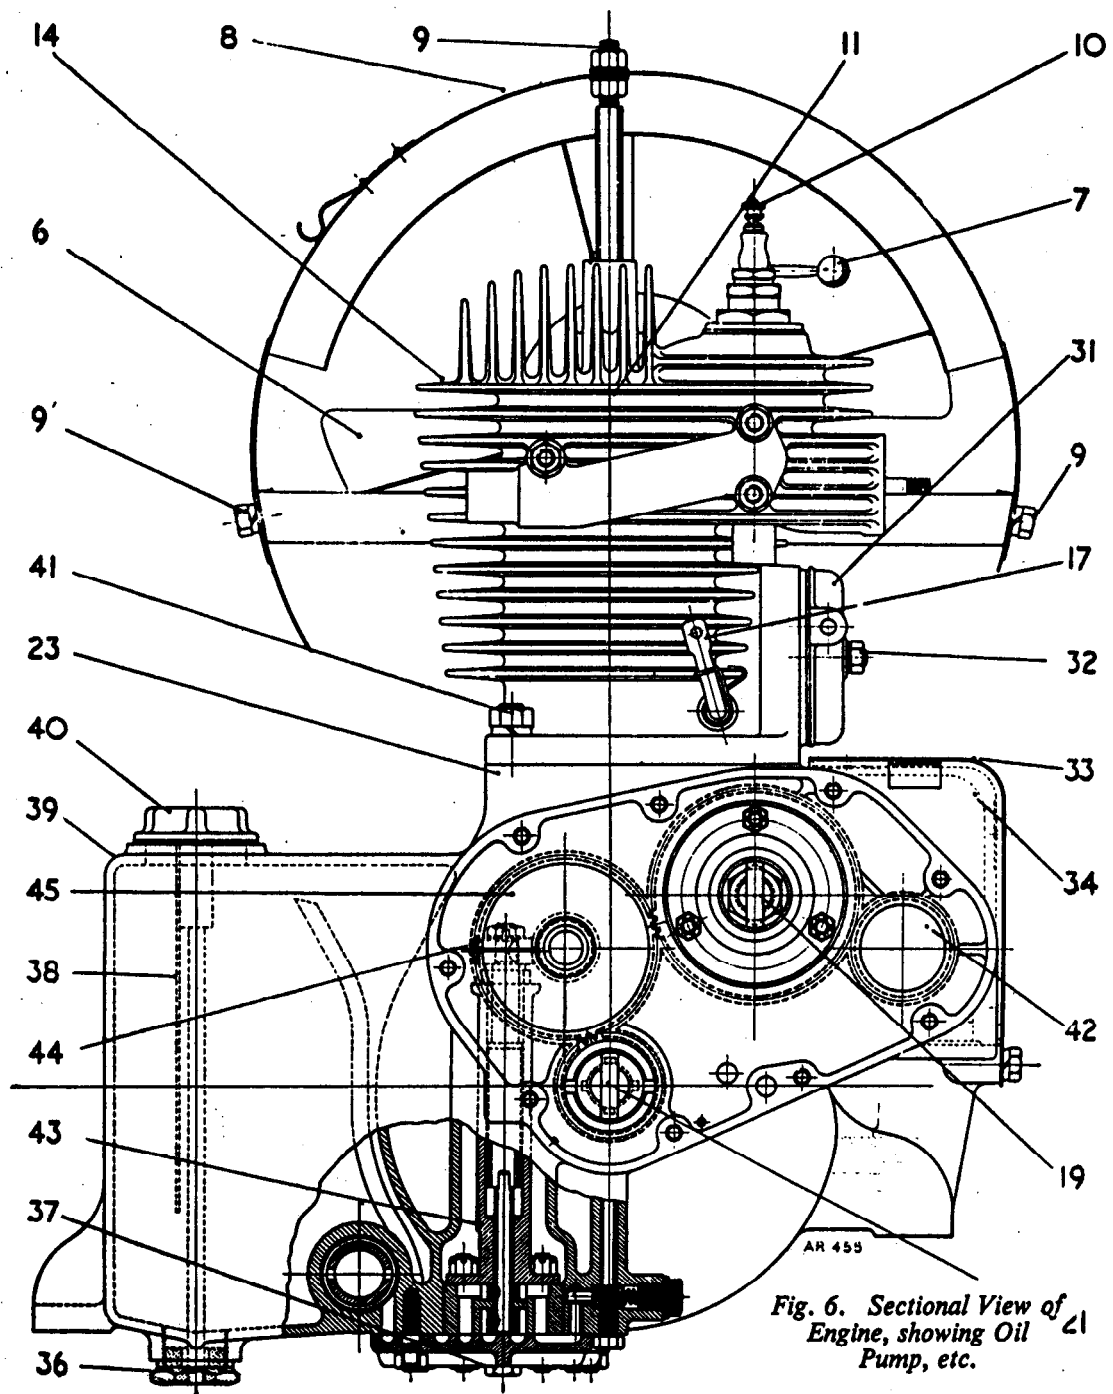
Sectional View of Engine, showing Oil Pump, etc.
